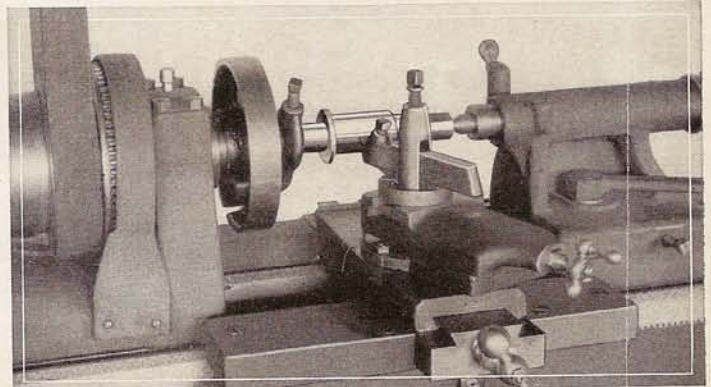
Turning a Bronze Bushing on a Mandrel Mounted Between the Centers of a 9-inch Junior Lathe
